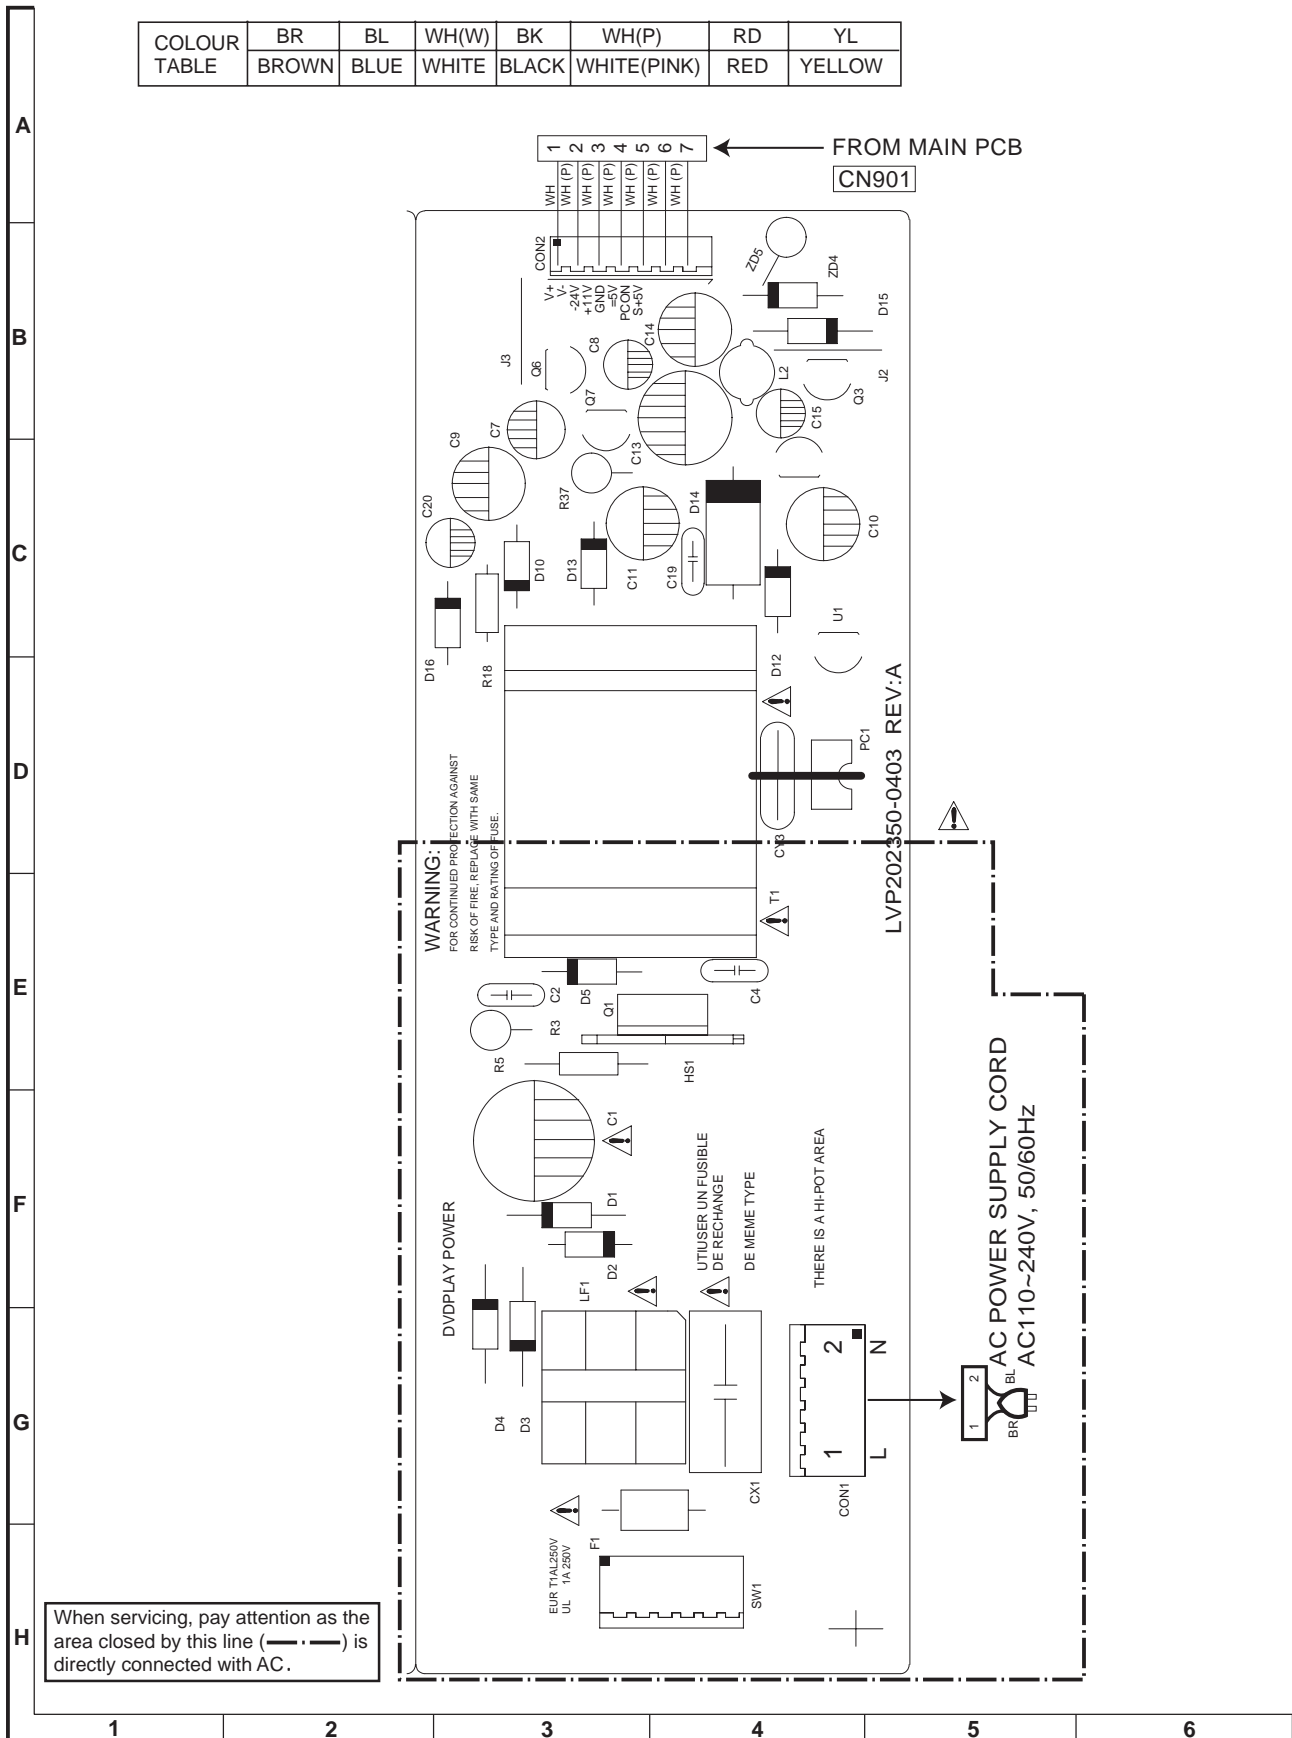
WIRING SIDE OF POWER PCB (TOP VIEW)
